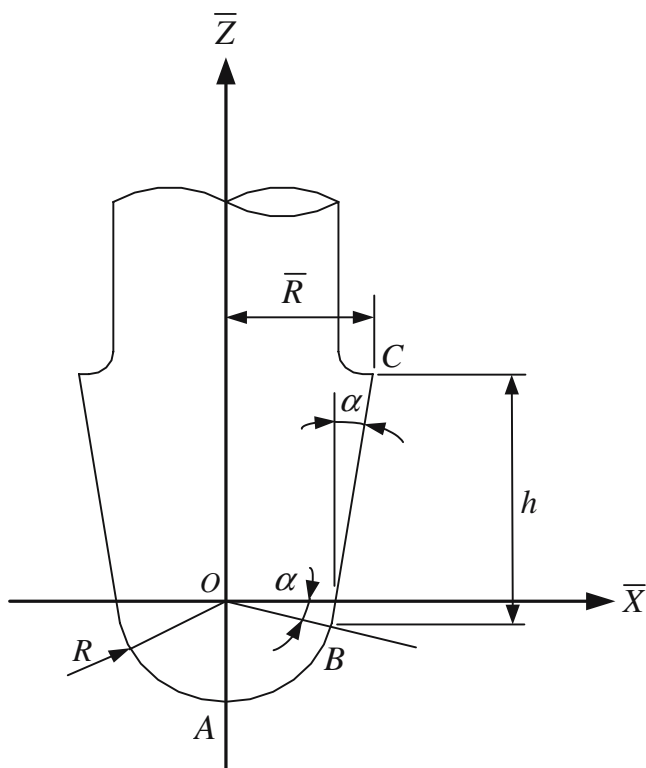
Revolving surfaces, axial cross-section profile and geometric parameters for designed revolving tool
